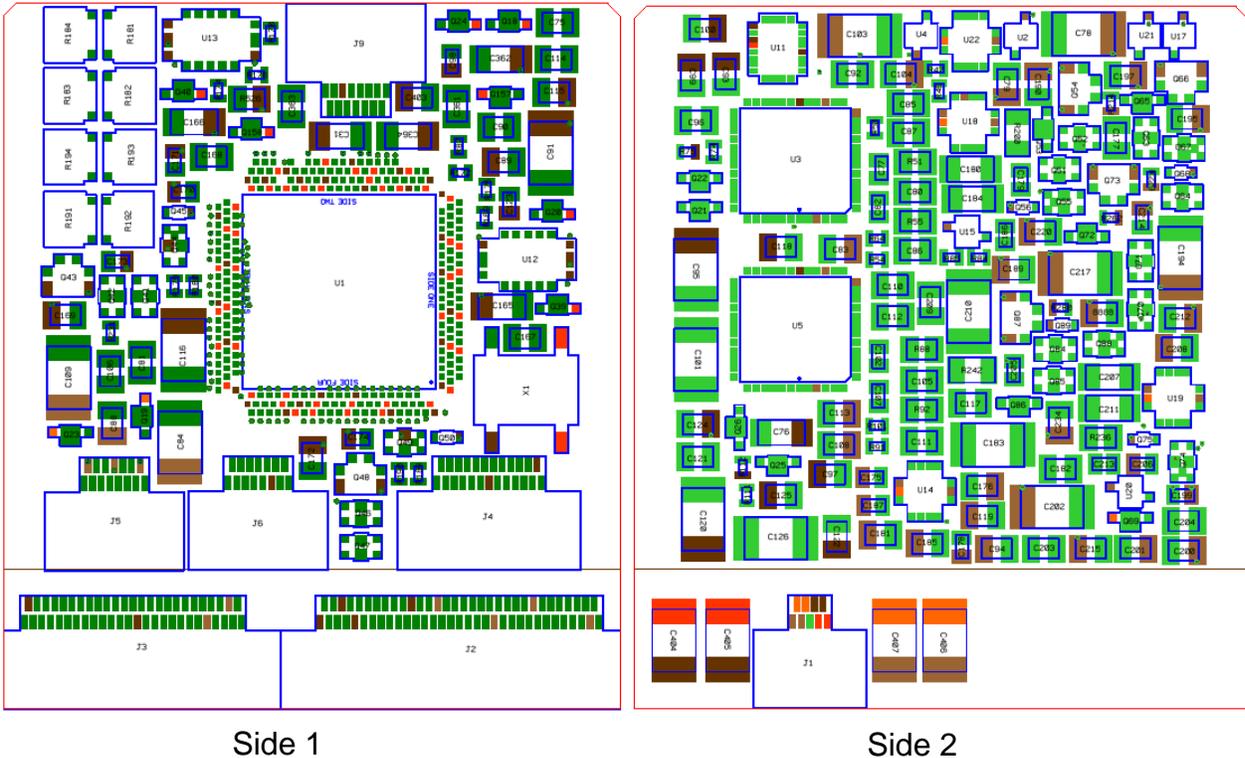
Current version of the embedded passives version of the PCB. This design represents a 50% reduction in overall board area. Connectors at the bottom of the PCB are for electrical performance testing access so that the embedded design can be compared to the original design.
